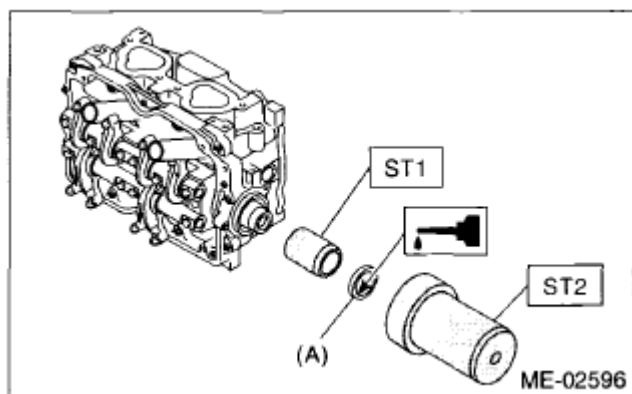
Applying Coat Of Engine Oil Onto Oil Seal
